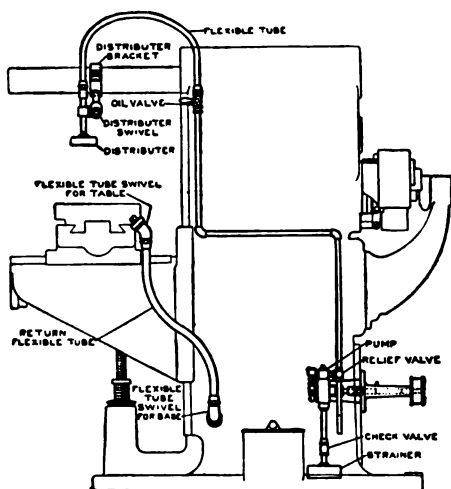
SEC. 10k.—Arrangement of oil piping for milling machines.
